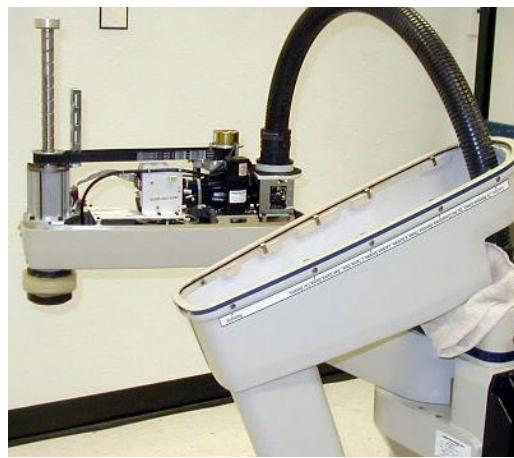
IP-65 Robot with Outer Link Cover Removed
